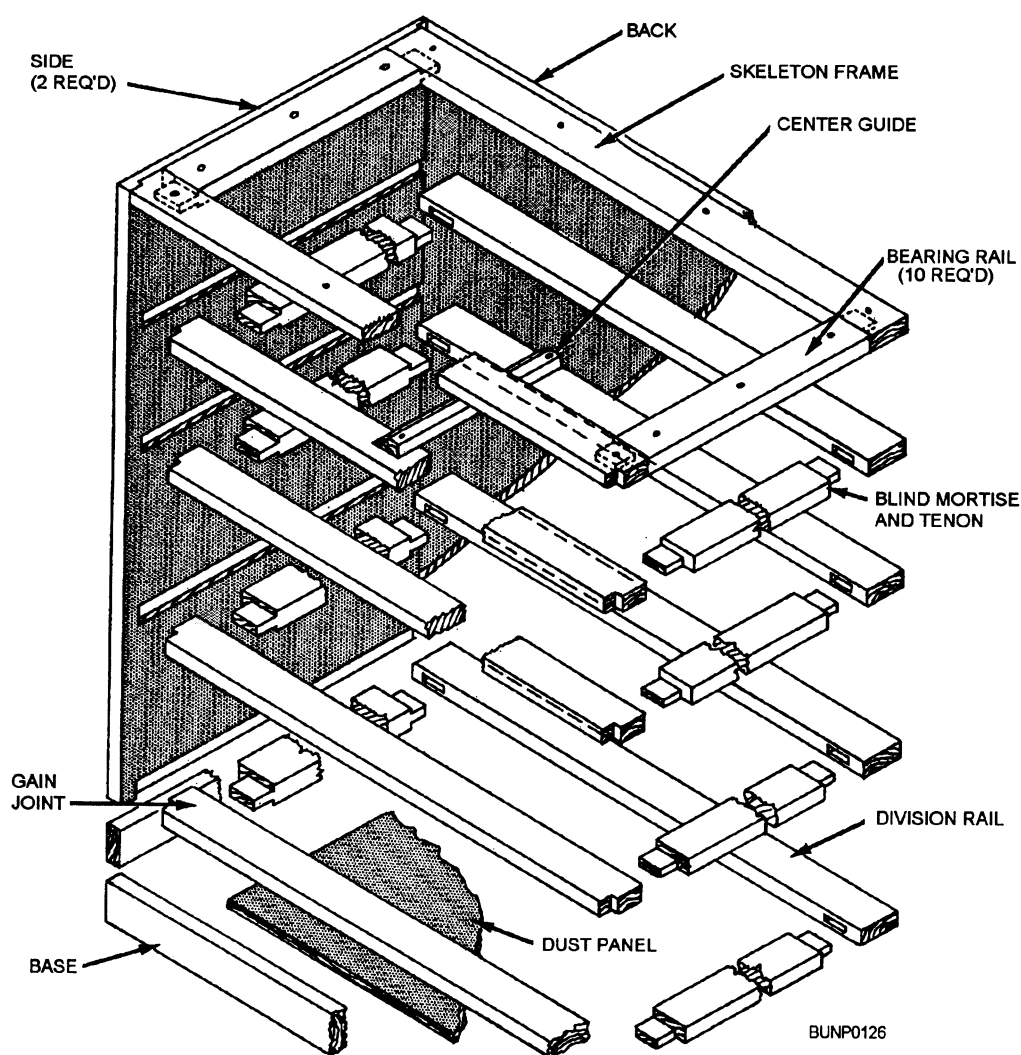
Exploded drawing and nomenclature of a cabinet.
